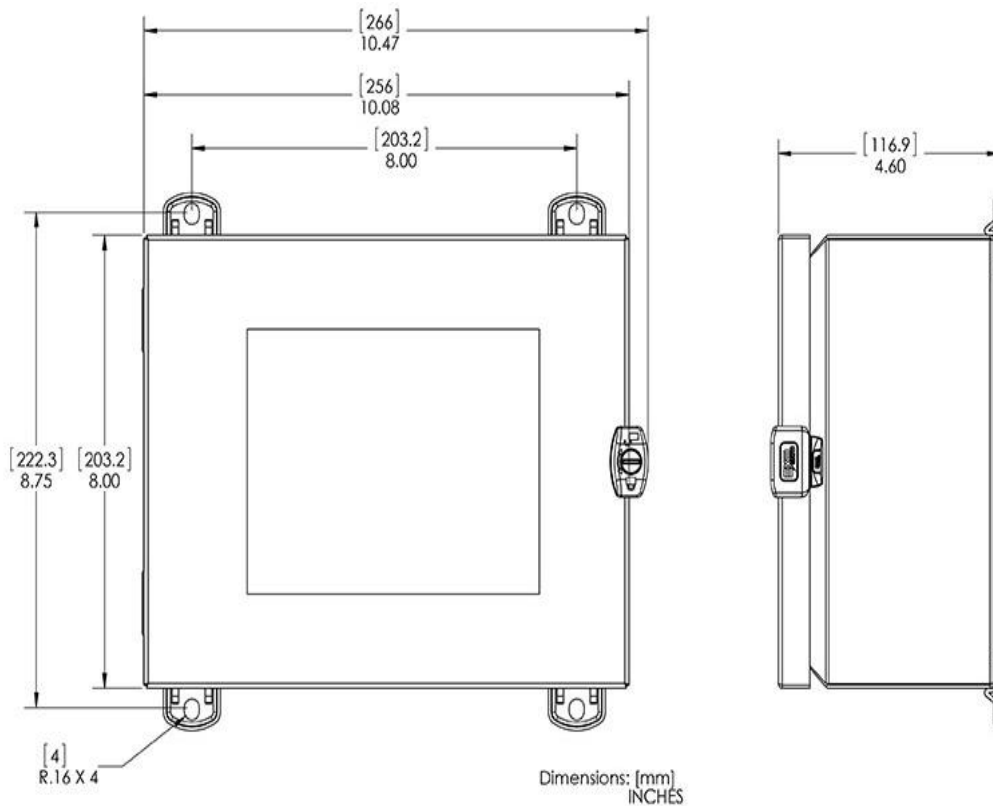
SMI 2 Enclosure: Mounting Dimensions
